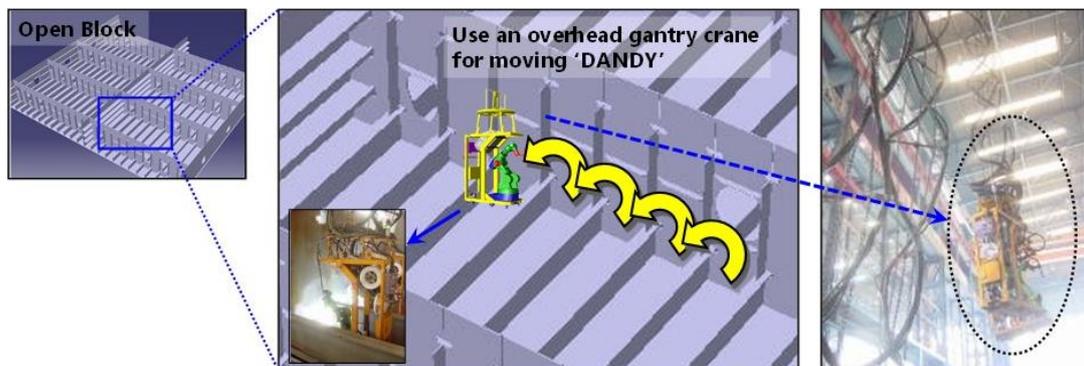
DANDY, a fixed welding robot used by Daewoo Shipbuilding & Marine Engineering in Korea.
